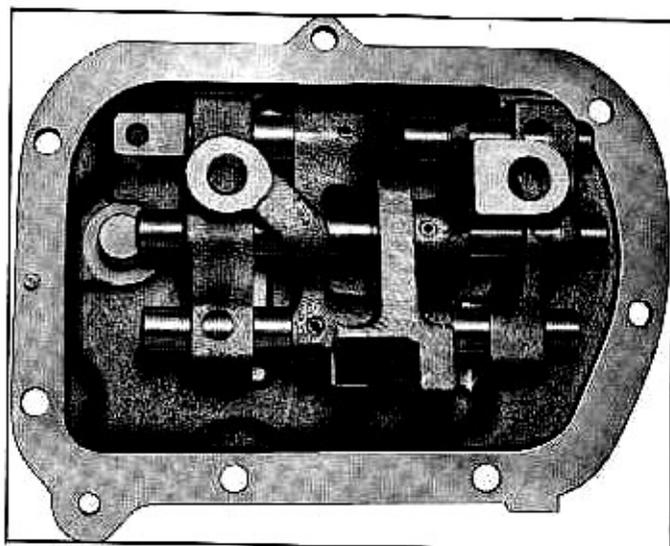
B—1-2 Shifter Shaft & Head Installed to Cover
